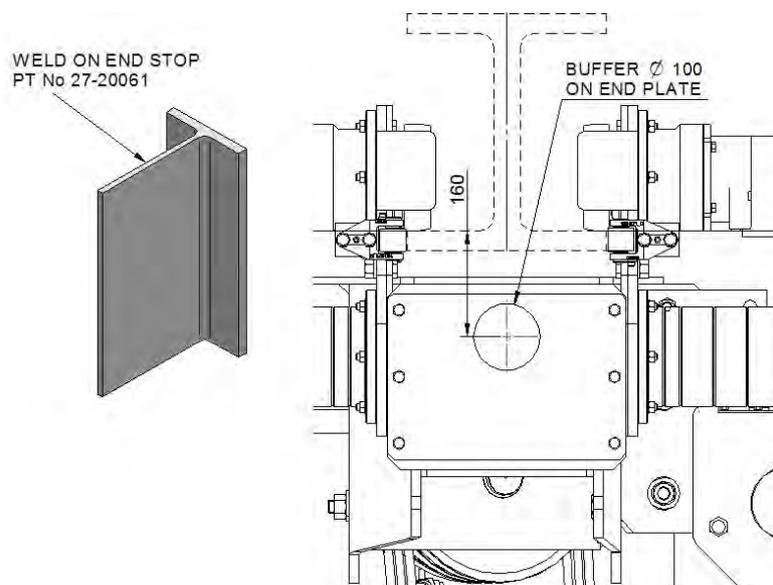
Single Girder 6 & 8 Fall Traverse End Stops
